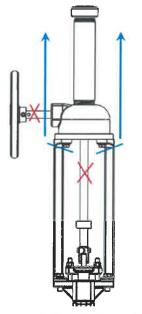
Knife Gate Valve with Bevel Gear Actuator, Vertical Lifting
